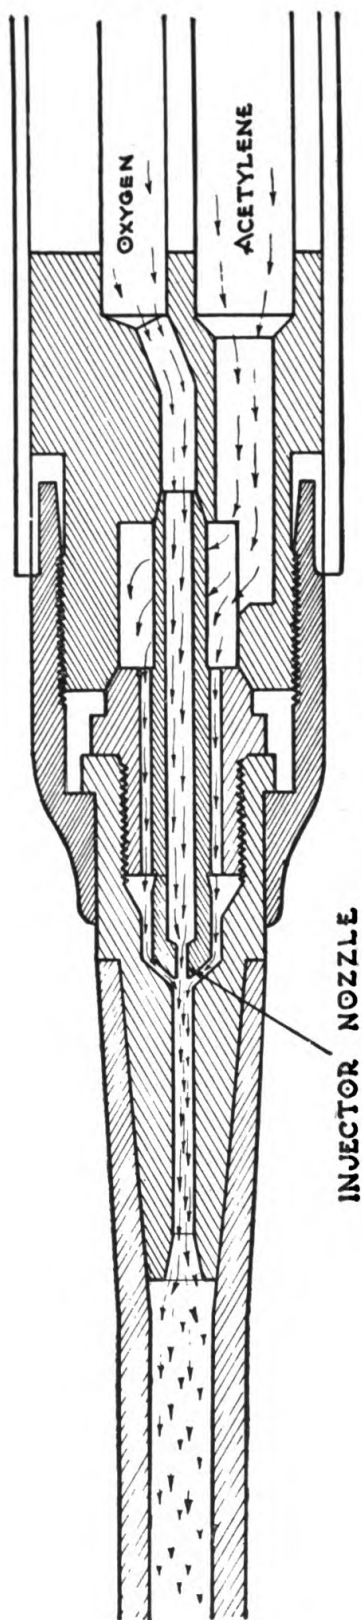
Mixing head for the injector type welding torch.
